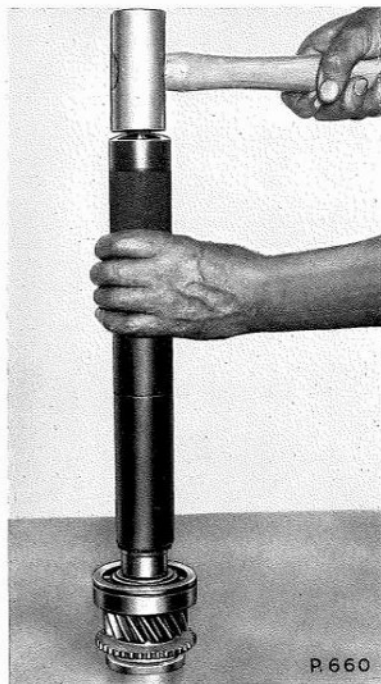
Refitting the bearing retaining ring in the primary shaft groove using Churchill Tool R.G.77 with the extension adaptor R.G.77-1 and the Churchill Pad R.G.79 to protect the gear cone.
